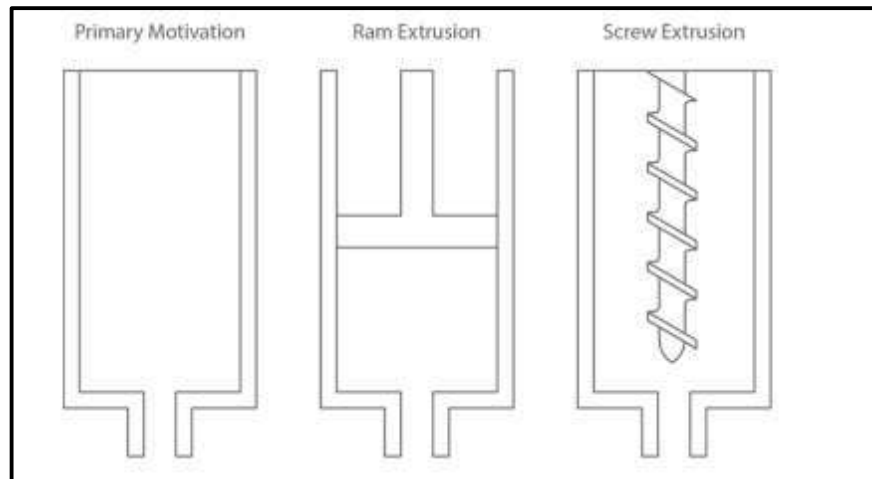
The Schematic Sketches of Extruder Mechanisms: Primary Motivation, Ram Extrusion, and Screw Extrusion
